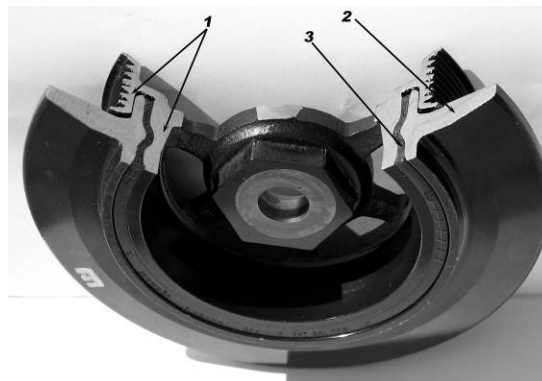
Rubber torsional vibration damper made by DAMPOL company: 1 – boss, 2 – inertial ring, 3 – rubber damping element
